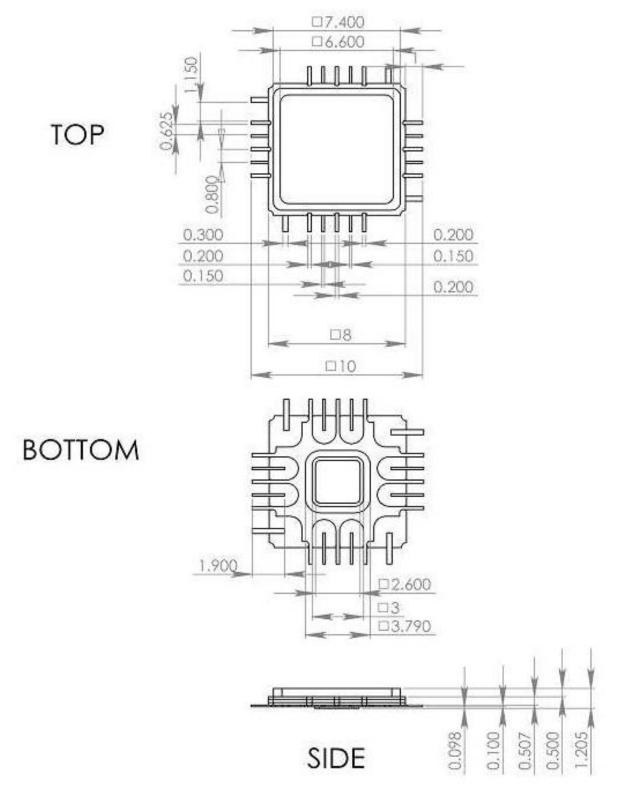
CQFP 24-Pin Package Drawing (All Dimensions in mm)
